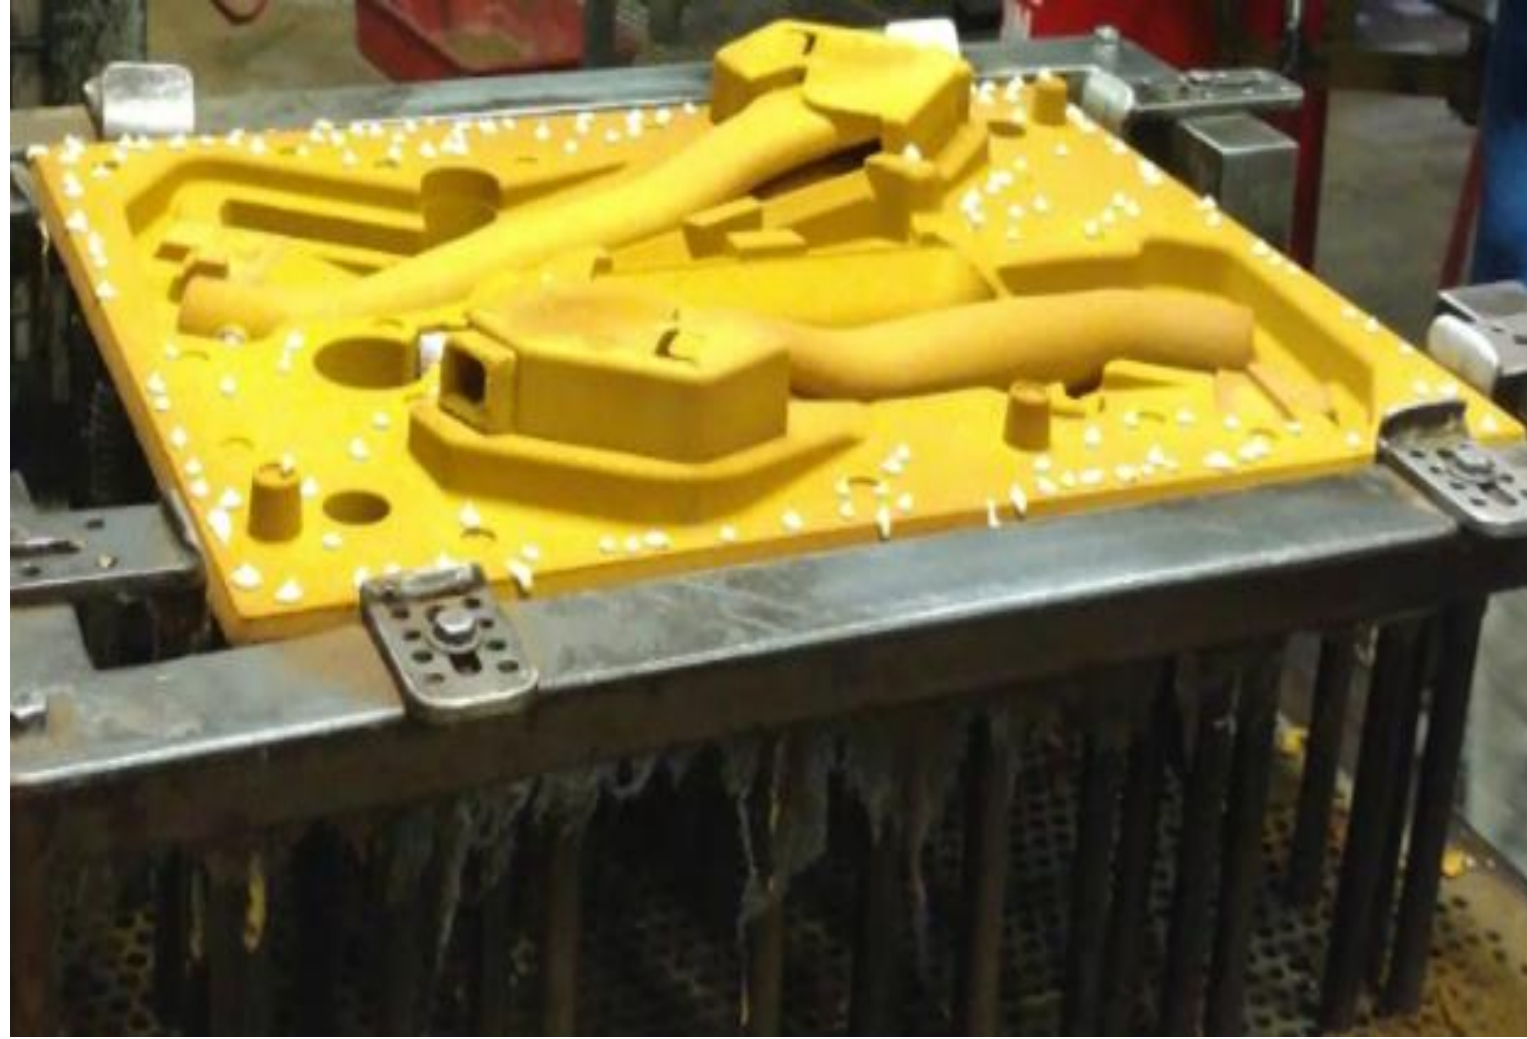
Pin machine used to bond two mold halves. Glue dabs are dropped on flat surface of parting line.
